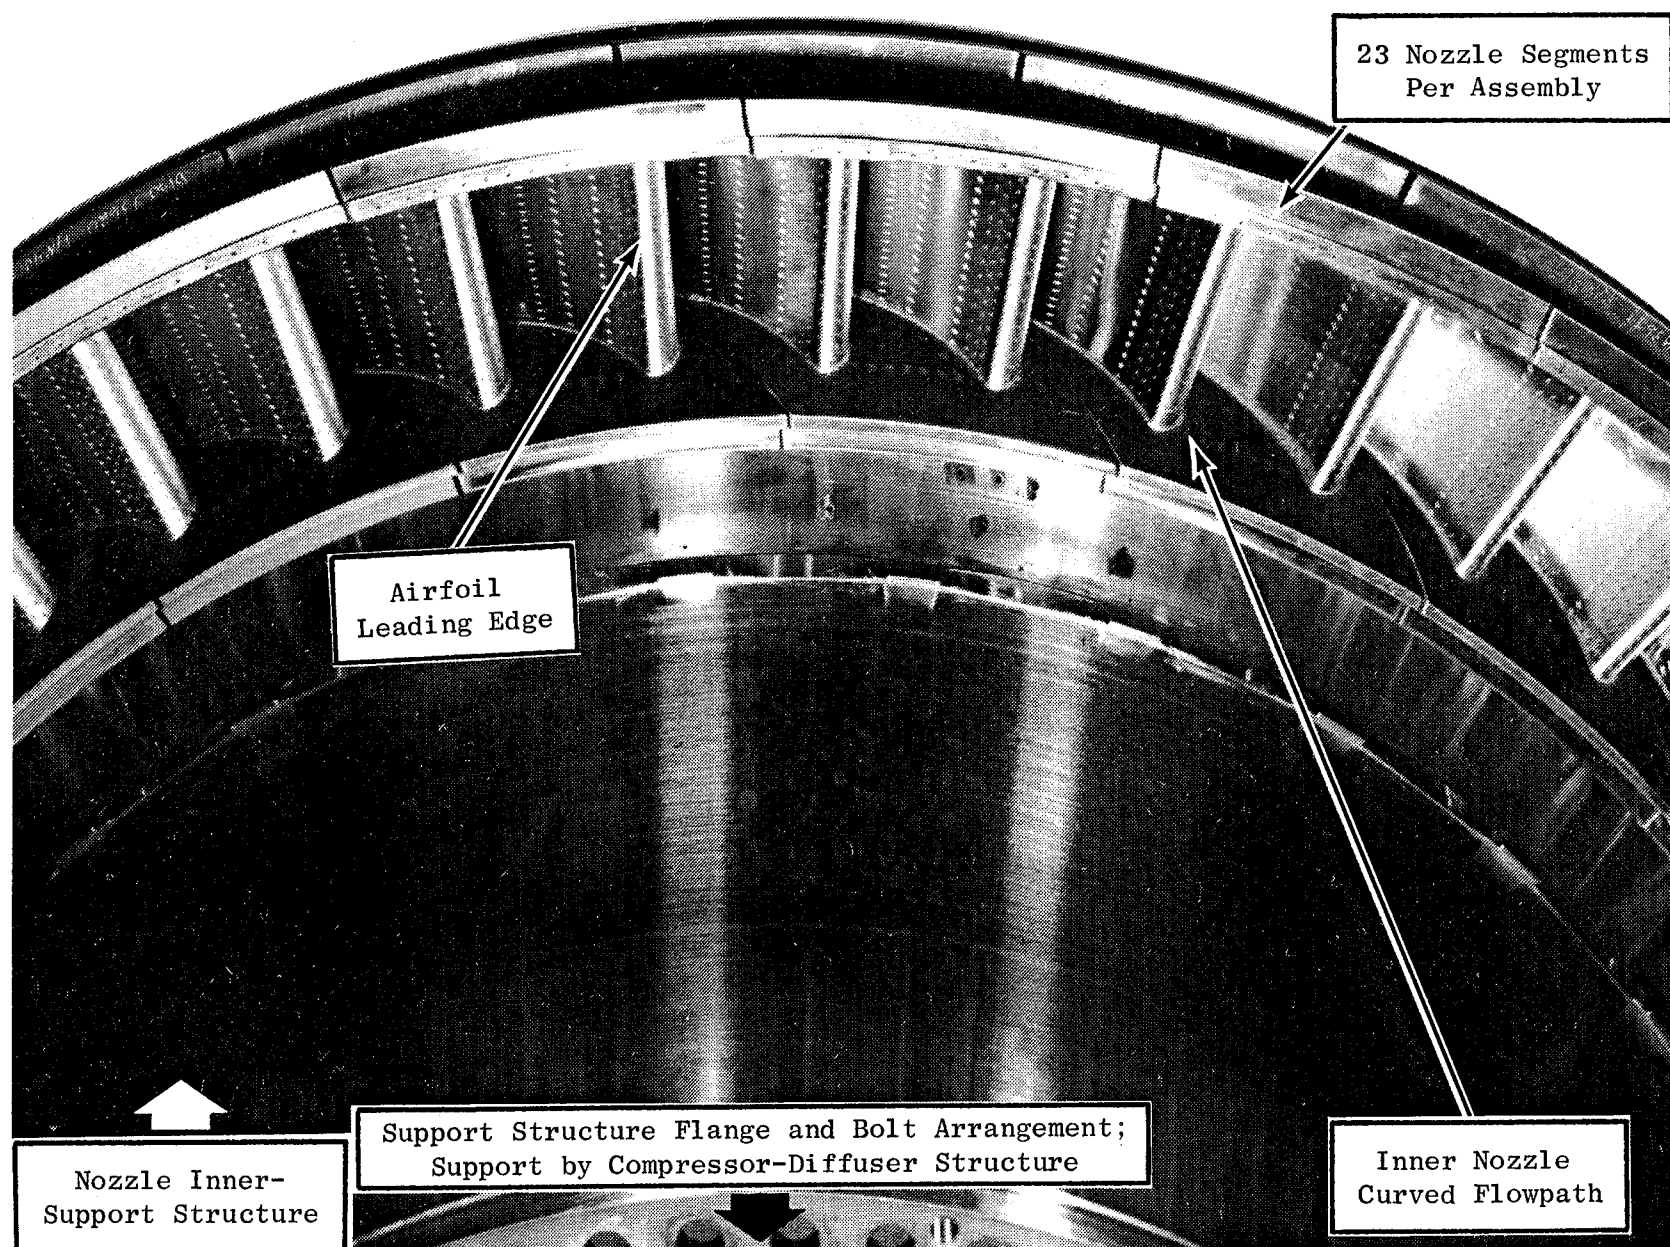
HP Turbine Stage 1 Nozzle Assembly.
